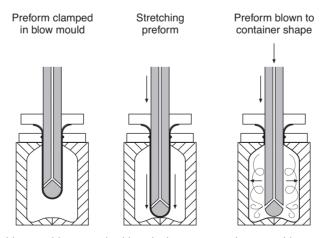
Stretch blow moulding – applicable to both extrusion and injection blow moulding. (Courtesy of The Packaging Society.)
